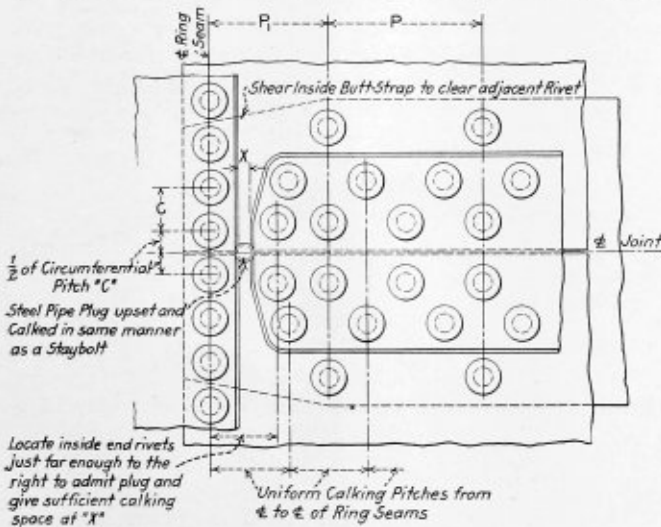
End Construction of "Inside" Joints for Thick Plates
